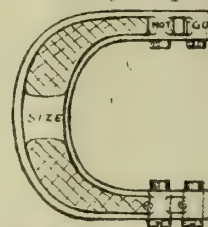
ADJUSTABLE EXTERNAL (CALIPER) GAUGE.
